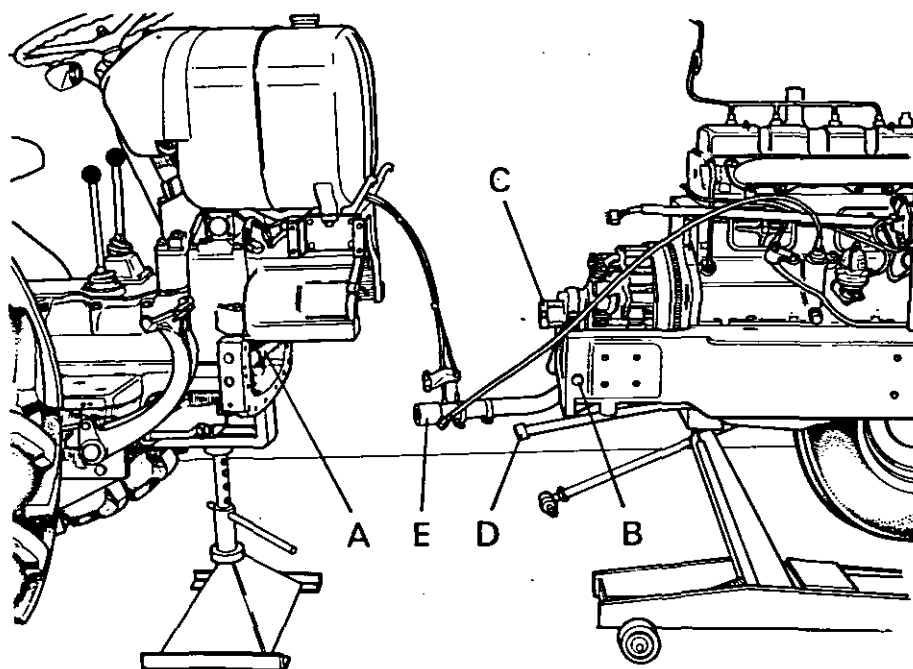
1200 TRACTOR "SPLIT" FOR CLUTCH REMOVAL
